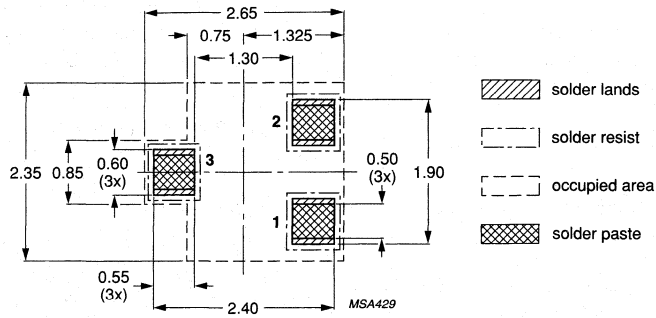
Reflow soldering footprint for SC-70 (SOT323).
